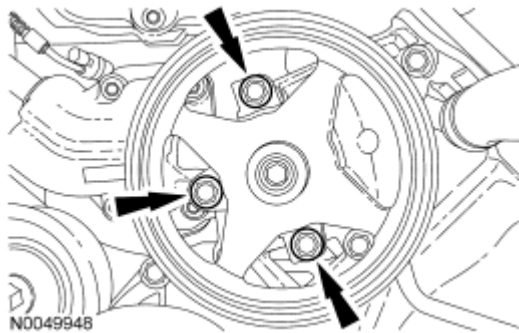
Locating Power Steering Pump & Reservoir Assembly Bolts
